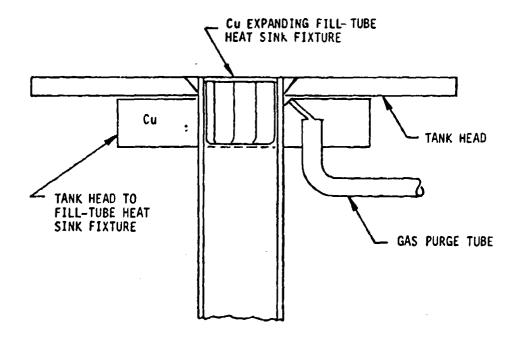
Weld Tooling for Fill-Tube to Tank Head Joint
